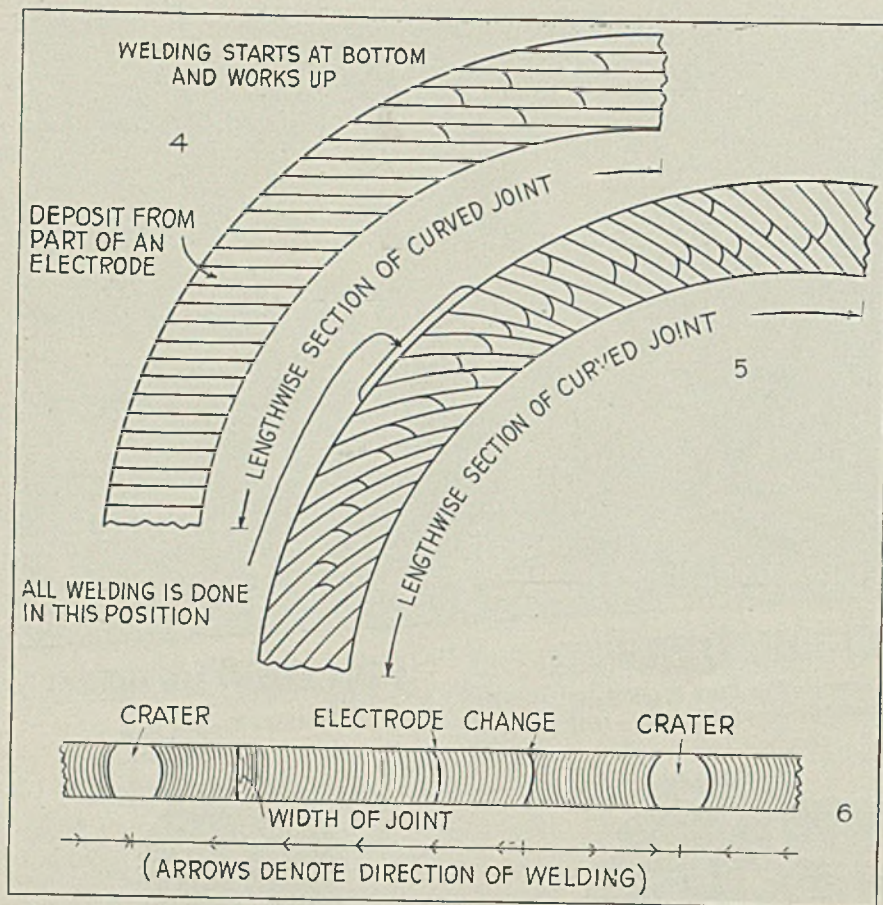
A cascade weld is made where the joint cannot be positioned for block welding. Fig. 5—Where the work can be positioned, a cascade weld is made in this manner. Fig. 6—This is what you see when looking at the top of a completed block weld
